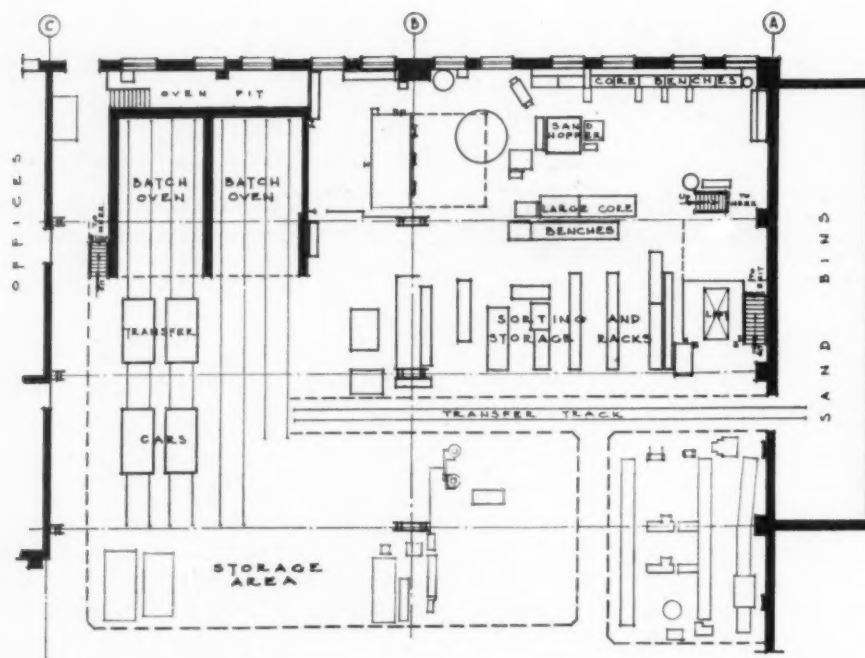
LAYOUT OF OLD CORE-MAKING ROOM
